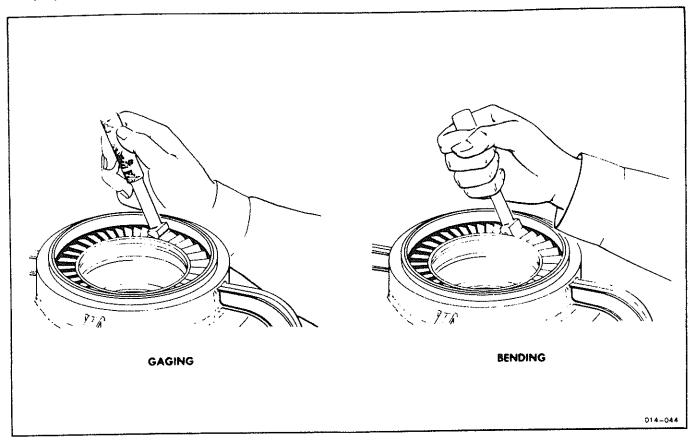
Gaging and Setting Nozzle Ring and Nozzle Box Vanes
